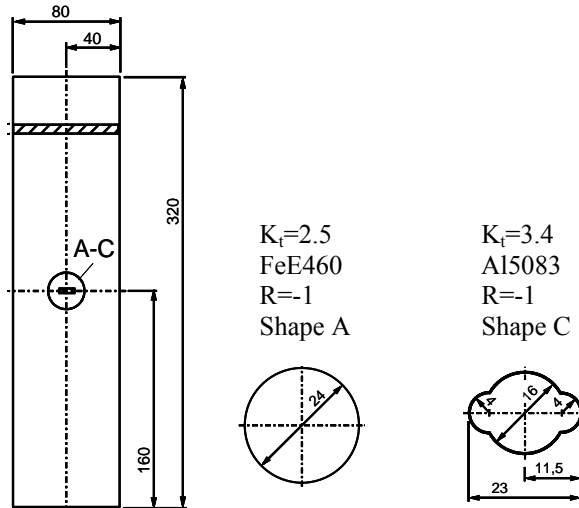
Specimen's geometry and load configuration, dimensions in [mm].
